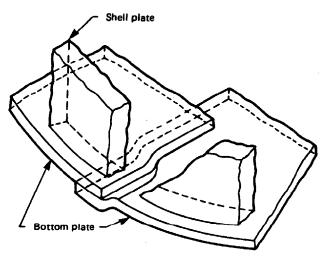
METHOD FOR PREPARING LAP-WELDED BOTTOM PLATES UNDER TANK SHELL
